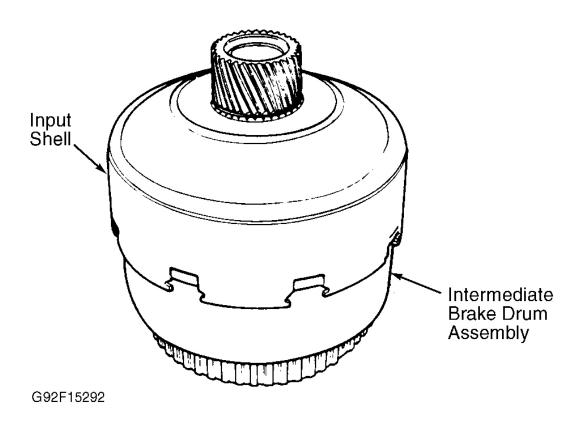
Assembling Direct Clutch, Forward Clutch & Input Shell Courtesy of FORD MOTOR CO.
